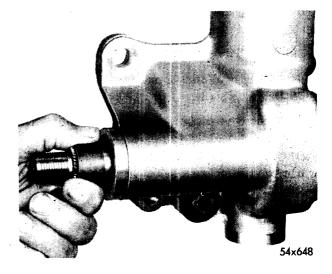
Removing Sleeve (Part of Tool C-3350) with Friction Tape
